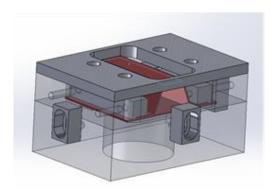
Technical Drawing of the Modified Mold with Screw-Fixed System.
